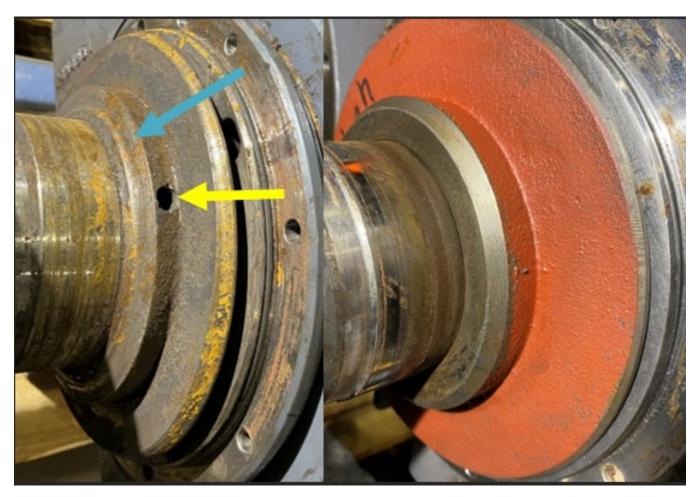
Step-drive main-shaft alignment flange showing one set-screw hole and ground down shoulder from interference with shaft end cap (Left). Undamaged shaft alignment flange from handrail shaft for comparison (Right).
